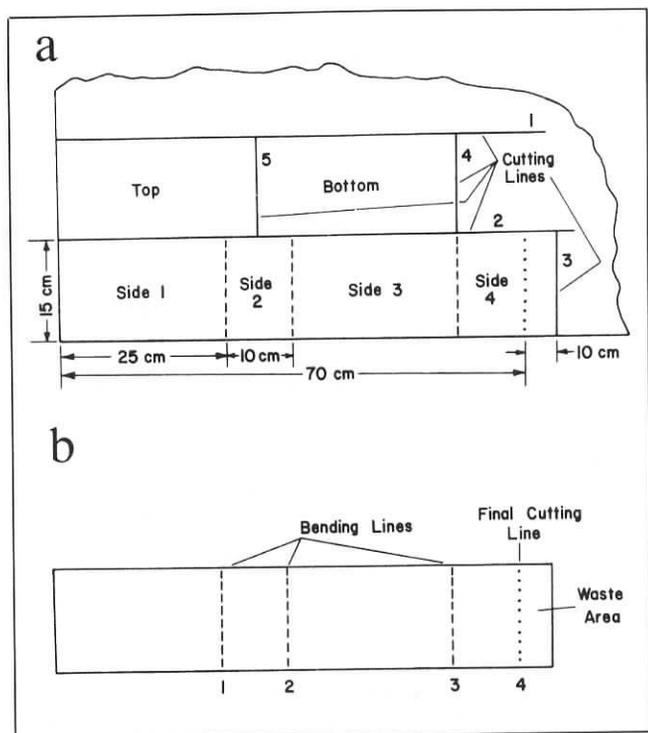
(a) Jar layout on 3mm plexiglass.
